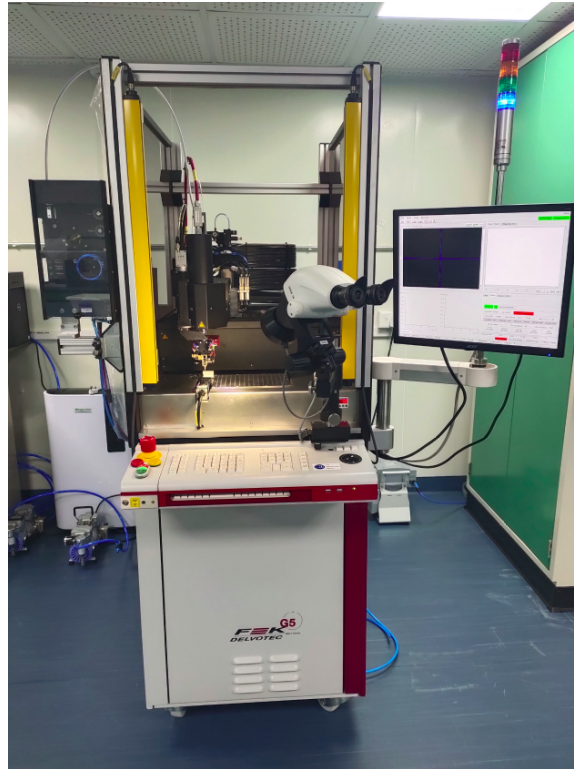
F&K Delvotec 64000 HSG5 wire bonding machine at the MP@NISER installed since October, 2019.
